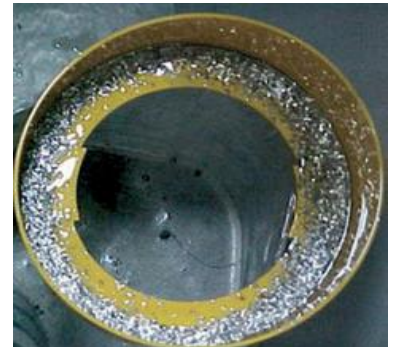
Metal shavings in the oil filter coming from the damaged second stage of the gearbox.
